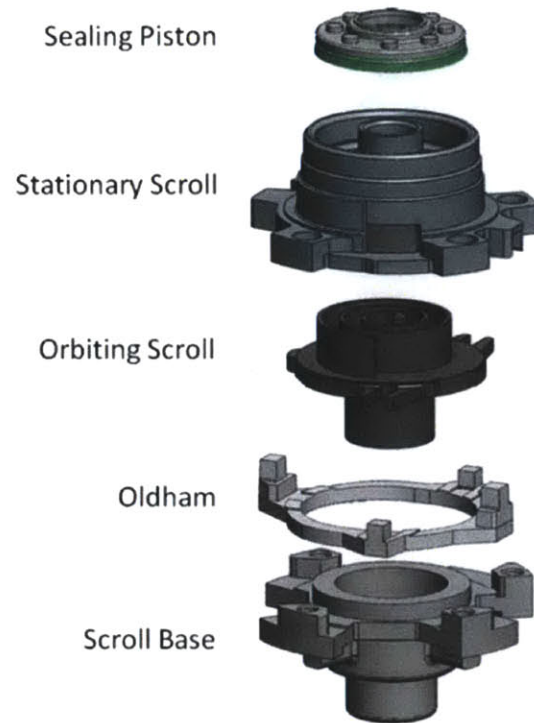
Exploded view of the working parts of a scroll compressor, from [65]
